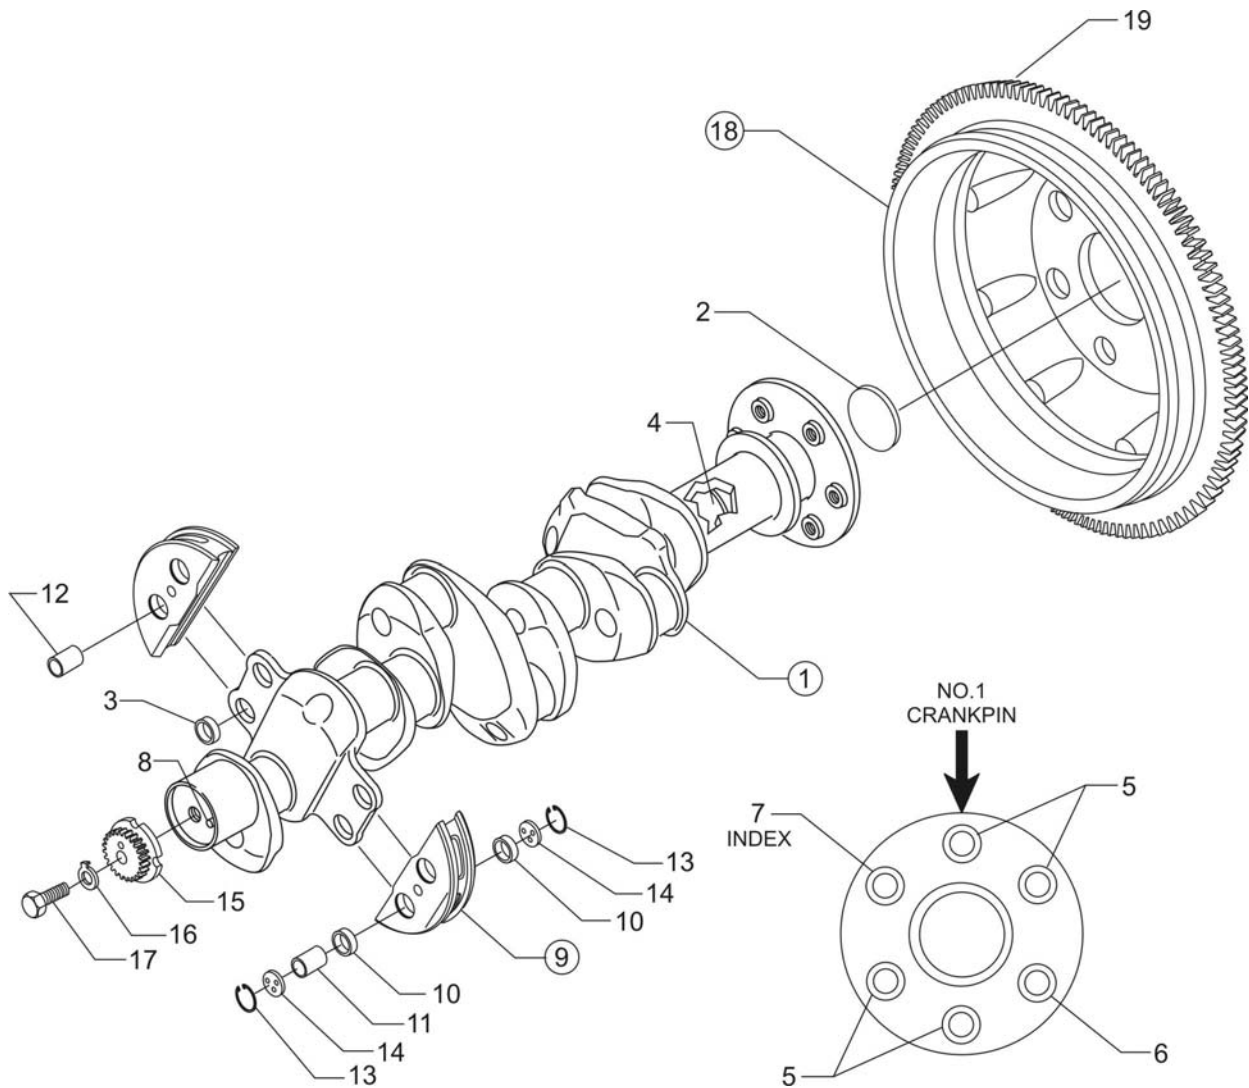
CRANKSHAFT AND COUNTERWEIGHT ASSEMBLY
